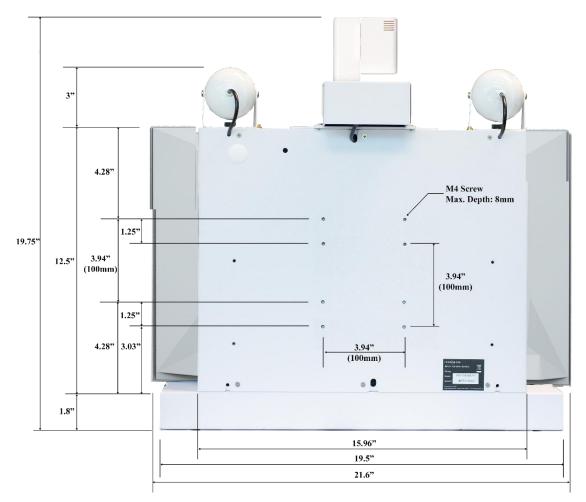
vCLINiC Rear view and Mounting Hole Locations
